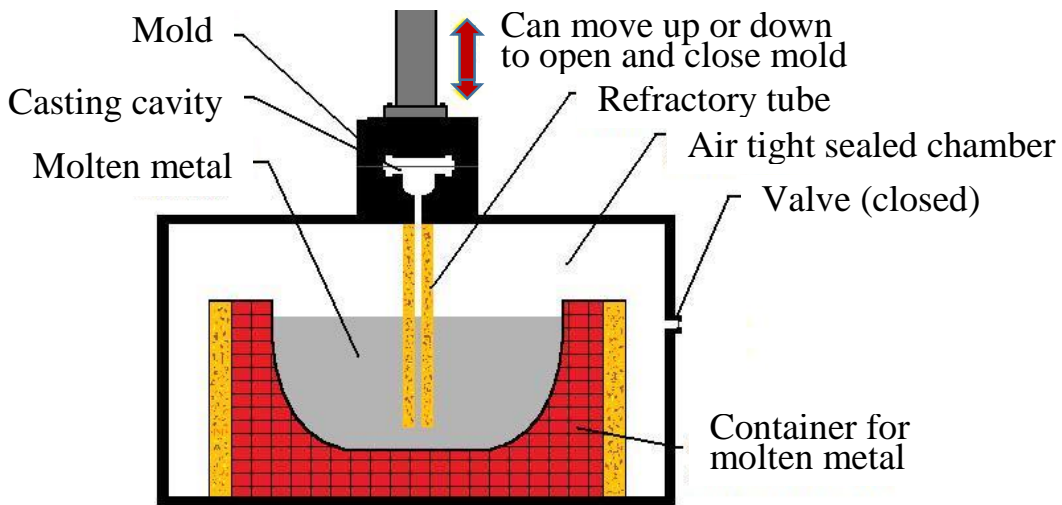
Pressure die casting mold is in place and operation is ready to begin
